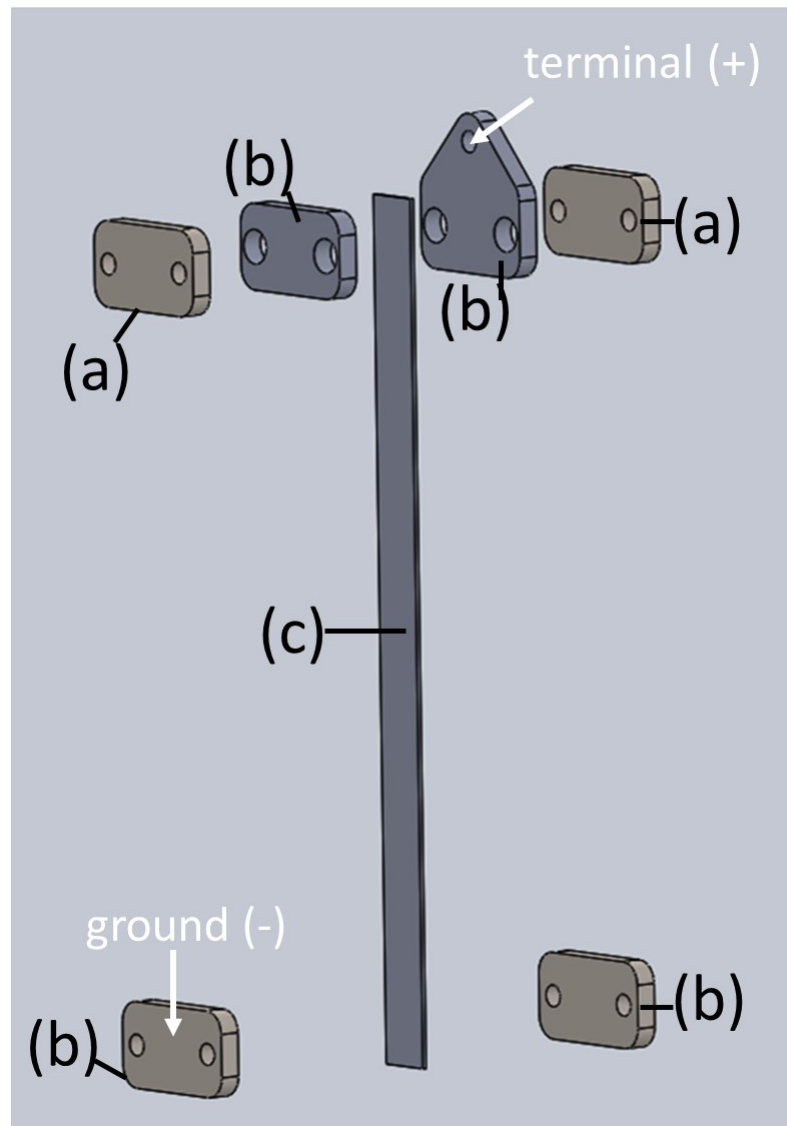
Picture showing an exploded view of the CAD model imported from Solidworks into COMSOL. The different components are (a) the ceramic Macor tabs (b) the cast 316L stainless steel tabs and (c) the SLM 316L test strip. The locations where the terminal and ground boundary conditions are labelled in the image
